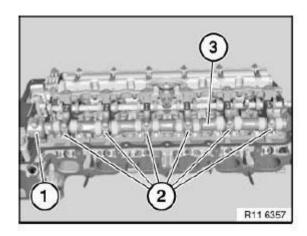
Identifying Bearing Caps Courtesy of BMW OF NORTH AMERICA, INC.
